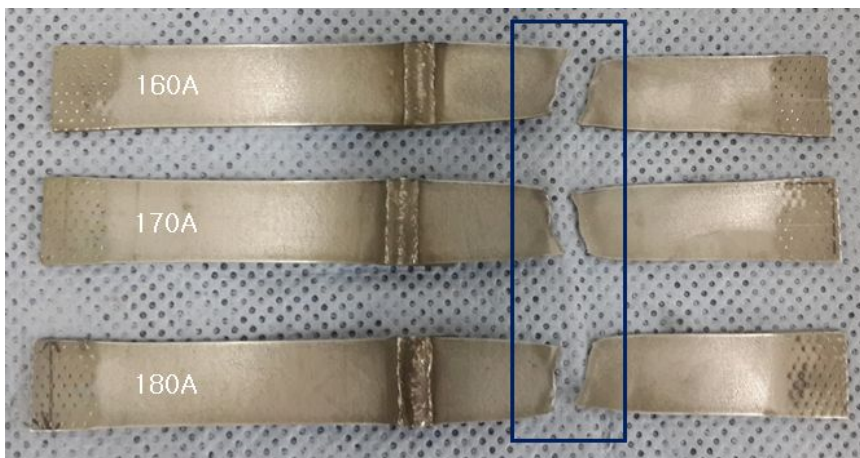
Fractured specimen after tensile-shear test(MC)
